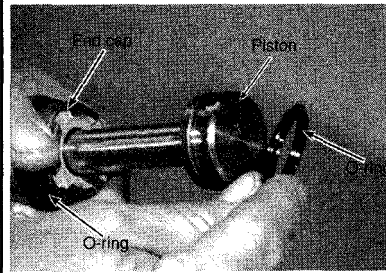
Pull the trim rod out from each cylinder and remove the O-rings from the end cap
